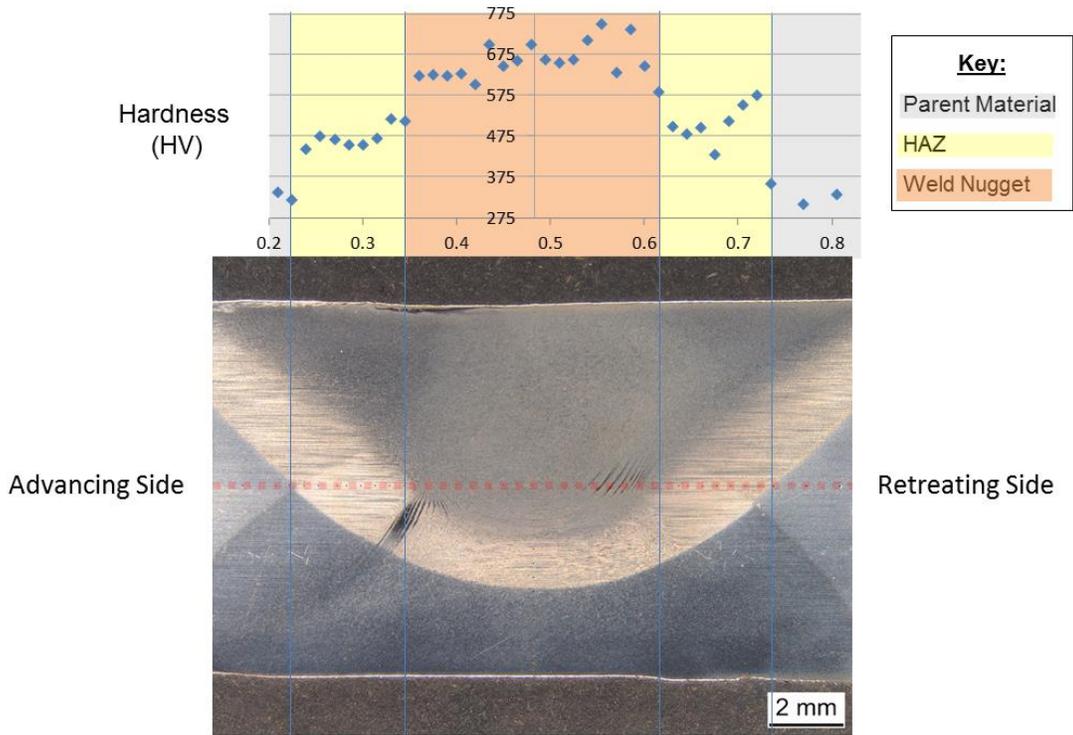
Horizontal hardness profile of a double pass weld.
